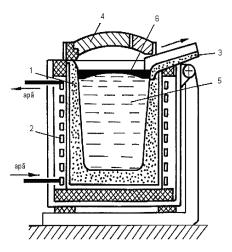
Induction furnace which was been used: $1 - \text{melting crucible based Al}_2O_3$; 2 - inductor; 3 - casting gutter; 4 - furnace output; 5 - metal bath; 6 - layer slag.
